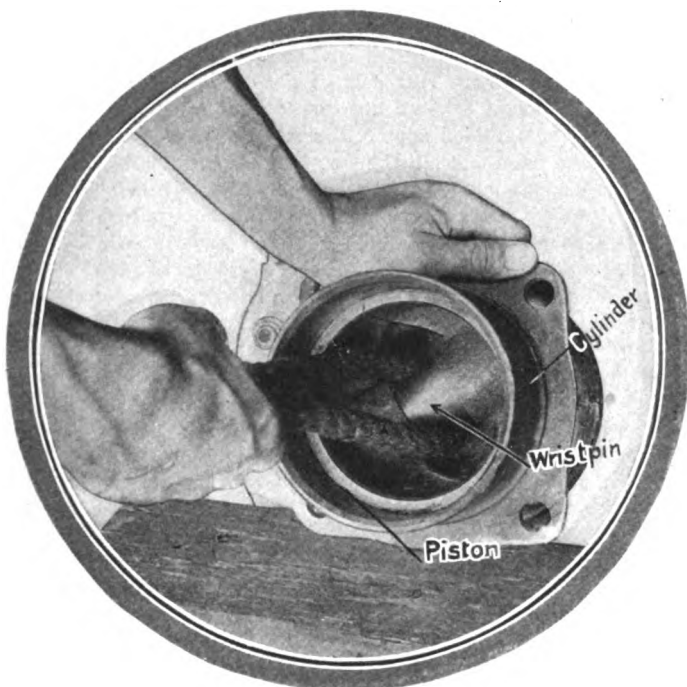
Method used in an attempt to remove piston from cylinder. This means proved inadequate, as the piston had rusted within the cylinder
